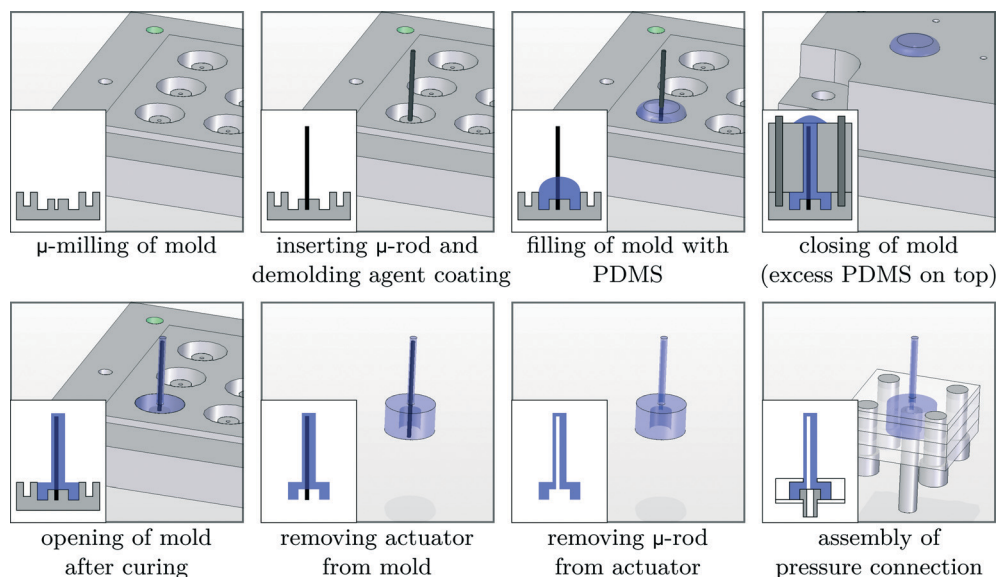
Overview of the production process, with cross-sectional views shown on the inset images in the lower left corner, to fabricate bio-mimicking pneumatic actuators.
